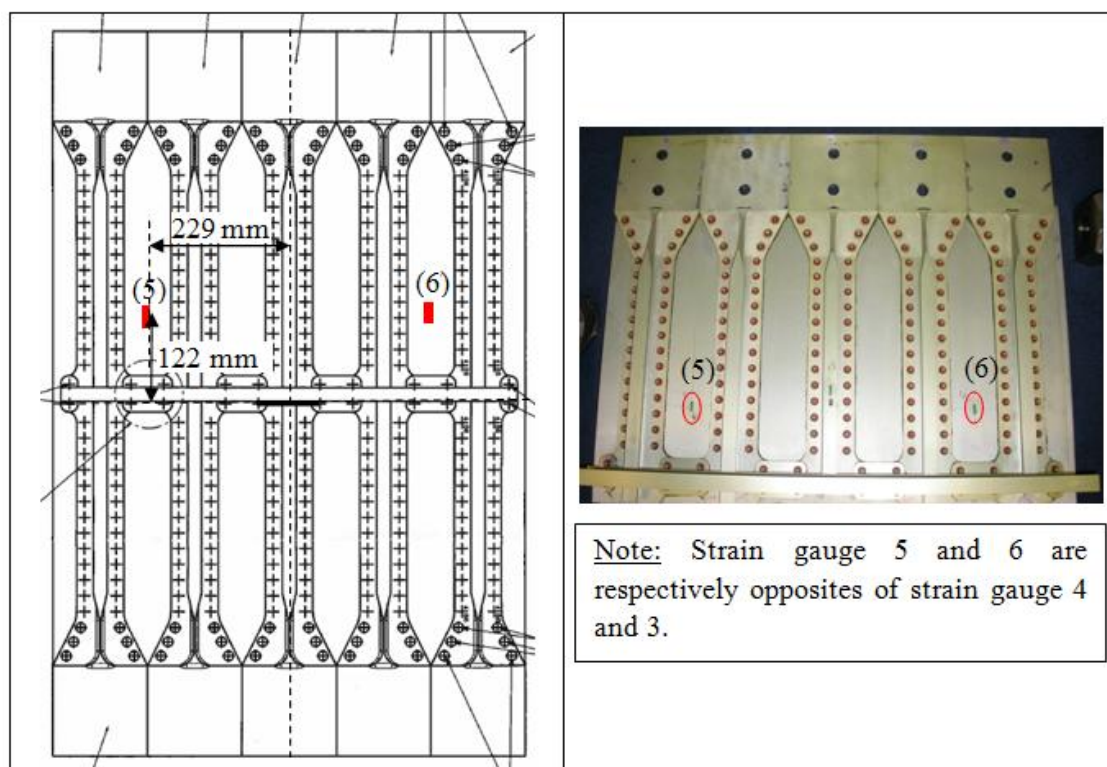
Panel 1 strain gauge location – Back view (strain gauge 5, 6)
